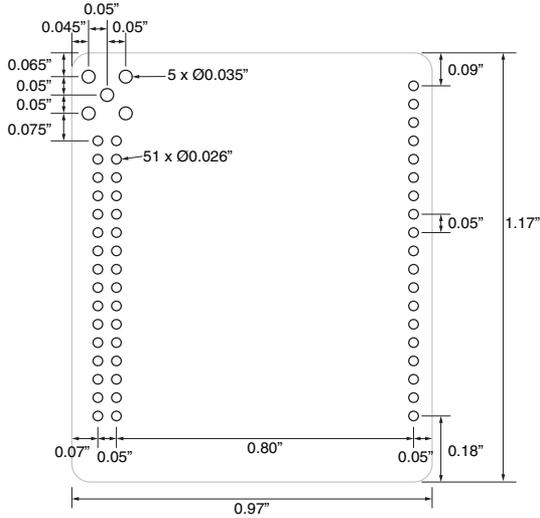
EVM-fff-PRC PCB Layout Dimensions
